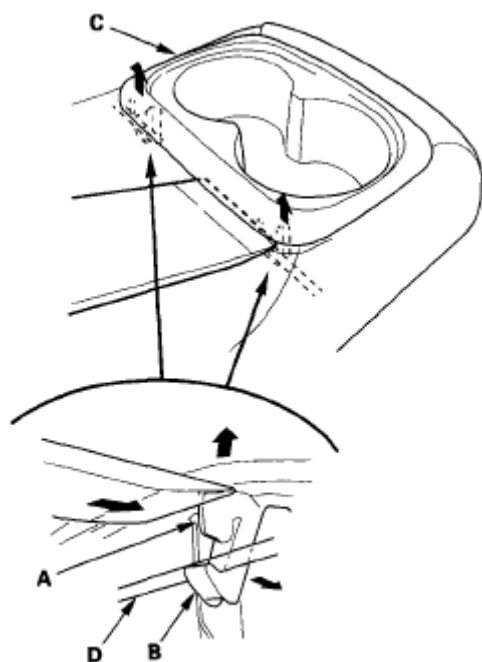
Pushing Bottom Ribs Of Rear Hooks To Pull Up Beverage Holder
